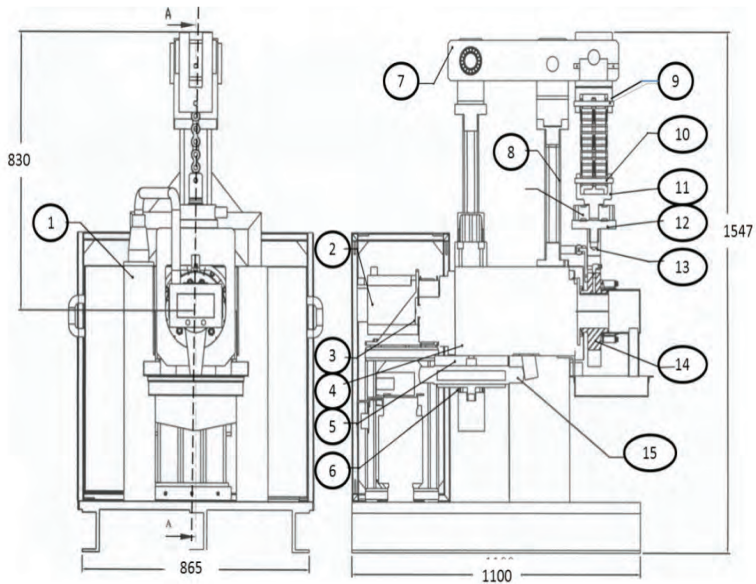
Diagram of journal bearing test rig 1. Frame, 2. Motor, 3. Motor bracket, 4. Spindle assy. 5. Bellow top plate, 6. Bellow guide plate, 7. Loading Lever, 8. Pivot assembly, 9. Chain, 10.Chain holder, 11. Load Cell holder, 12. Load Cell, 13. Loading plate, 14. Bearing unit and 15. Pneumatic bellows (Ahmad, 2014)
